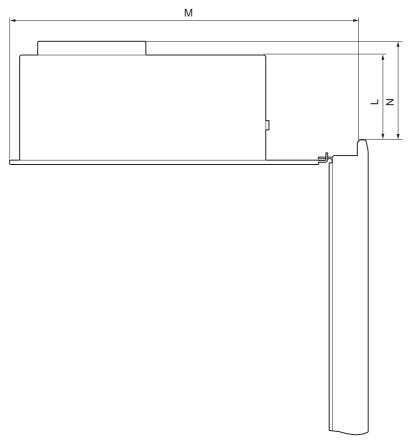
Panel PC 677 dimensional drawing, computer unit swung away from control unit
